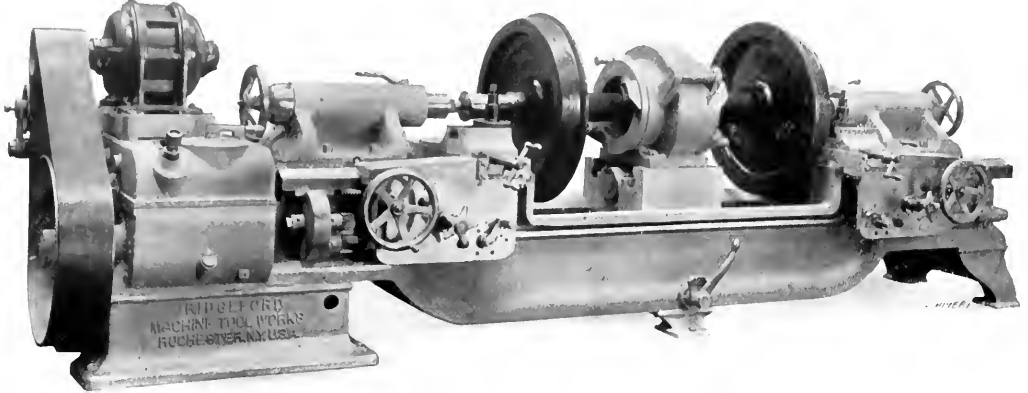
Bridgeford Axle Lathe equipped with two Carriages
